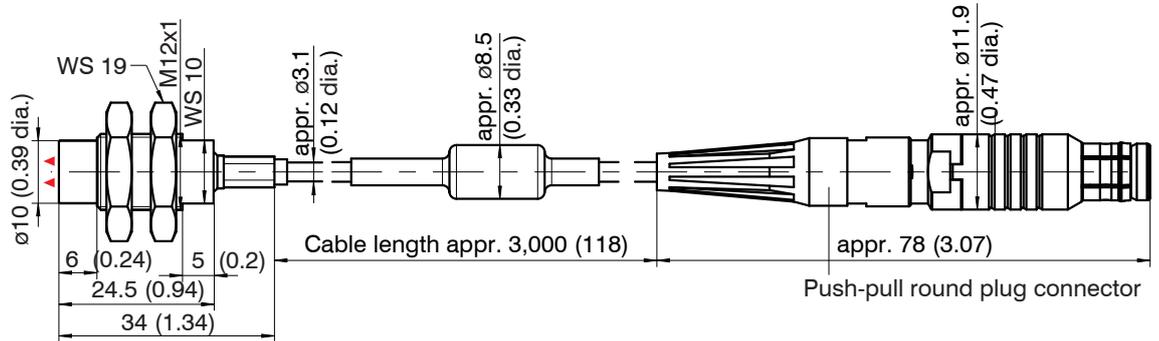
Dimensions EPU3, dimensions in mm (inches), not to scale
